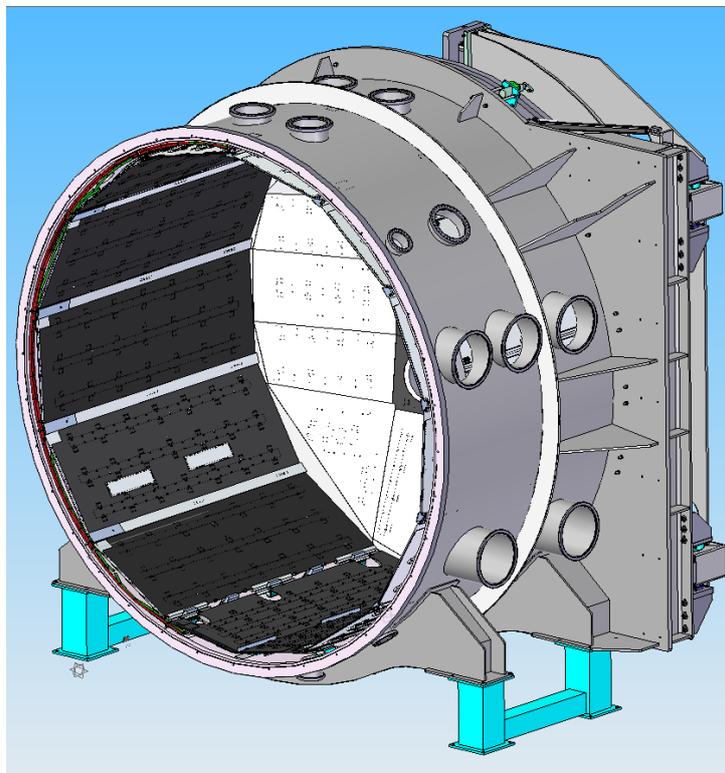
STC Chamber cross-section showing rectangular shroud panels in body
